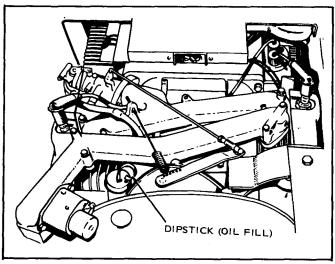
DIPSTICK LOCATION (TOP VIEW)
